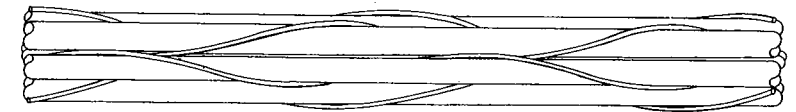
Side view of section of seven-rod fuel cluster, illustrating wire wrap.
